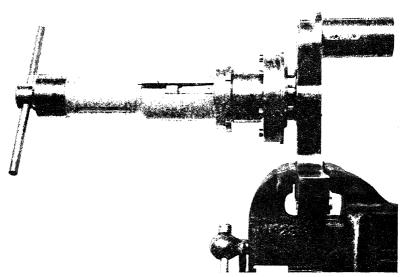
Application of extractor for withdrawing front inner roller race.
